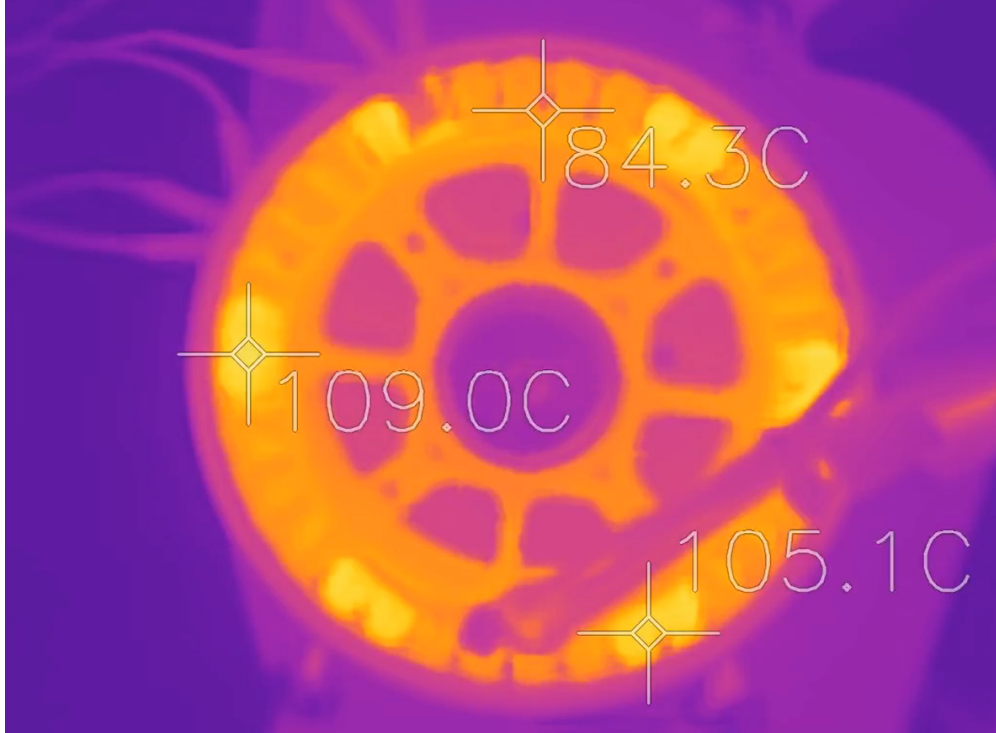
A delta wound motor with current flowing through two leads with the majority of the heat produced through one phase. This method can be used to identify winding type by visual inspection.
